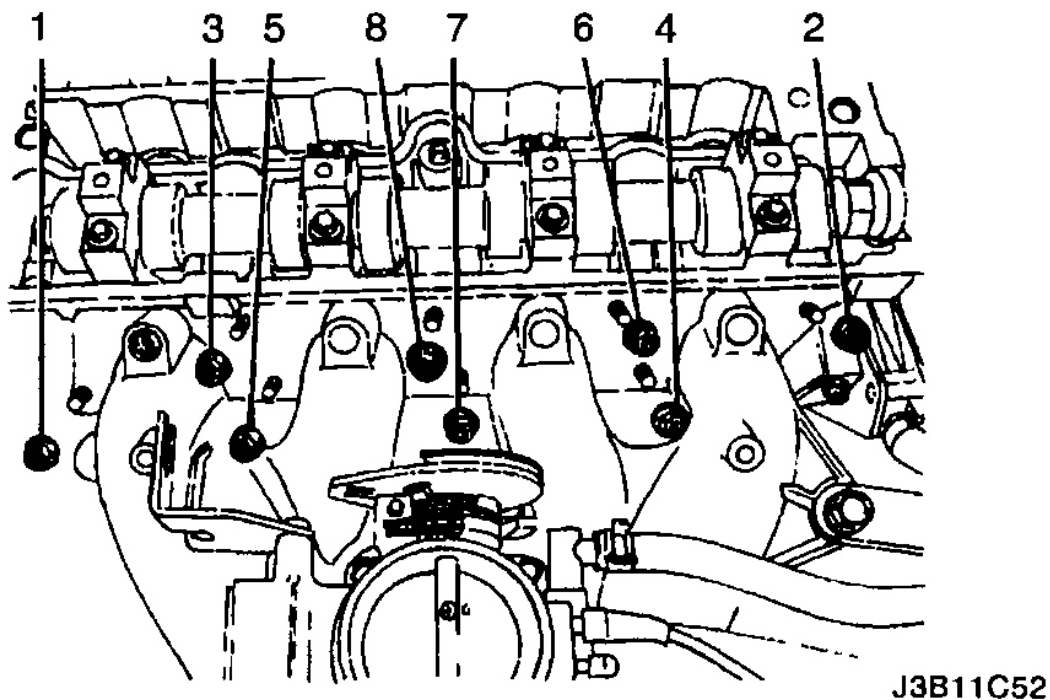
Removing Intake Manifold Retaining Nuts And Retaining Bolt
